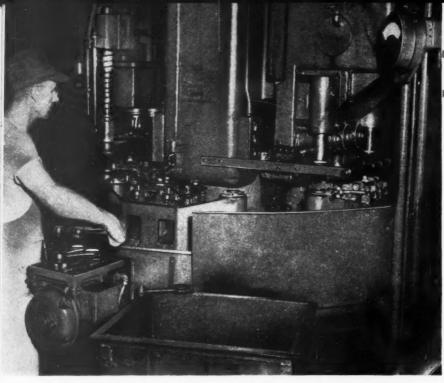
Solid connectingrod forgings are drilled, milled, and sawed apart at the rate of eighty-five per hour on a four-station indexing machine
